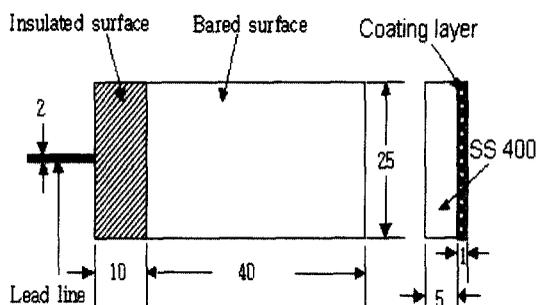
Shape and dimension of impingement erosion-corrosion test sample (unit : mm).
